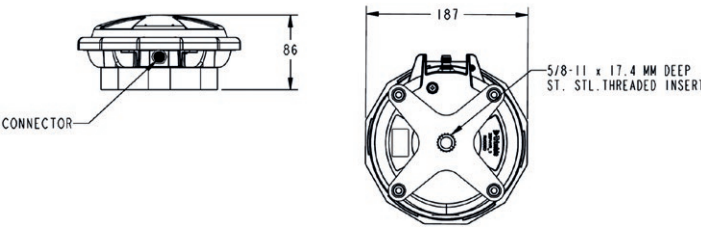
Technical Drawing of Zephyr 3 with 5/8" mounting
